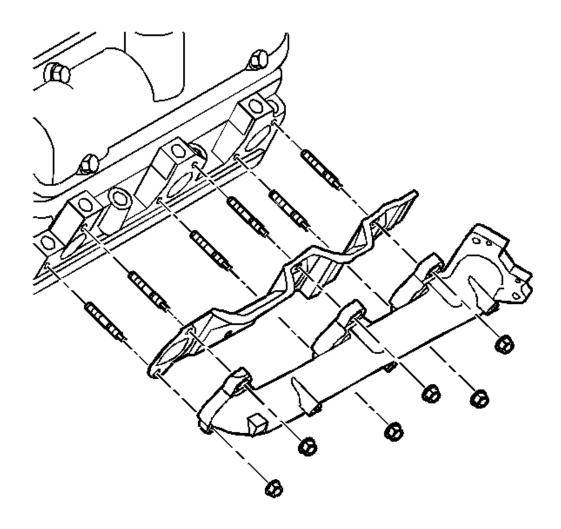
View Of Exhaust Manifold & Exhaust Manifold Gasket - Left Courtesy of GENERAL MOTORS CORP.
